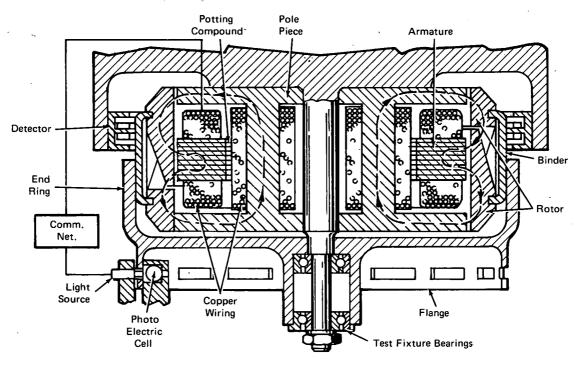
Cross Sectional View of Motor Showing Two of Four Pole Pieces.
